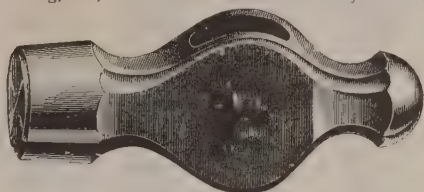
ENGINEER'S BALL PANE HAMMER.
